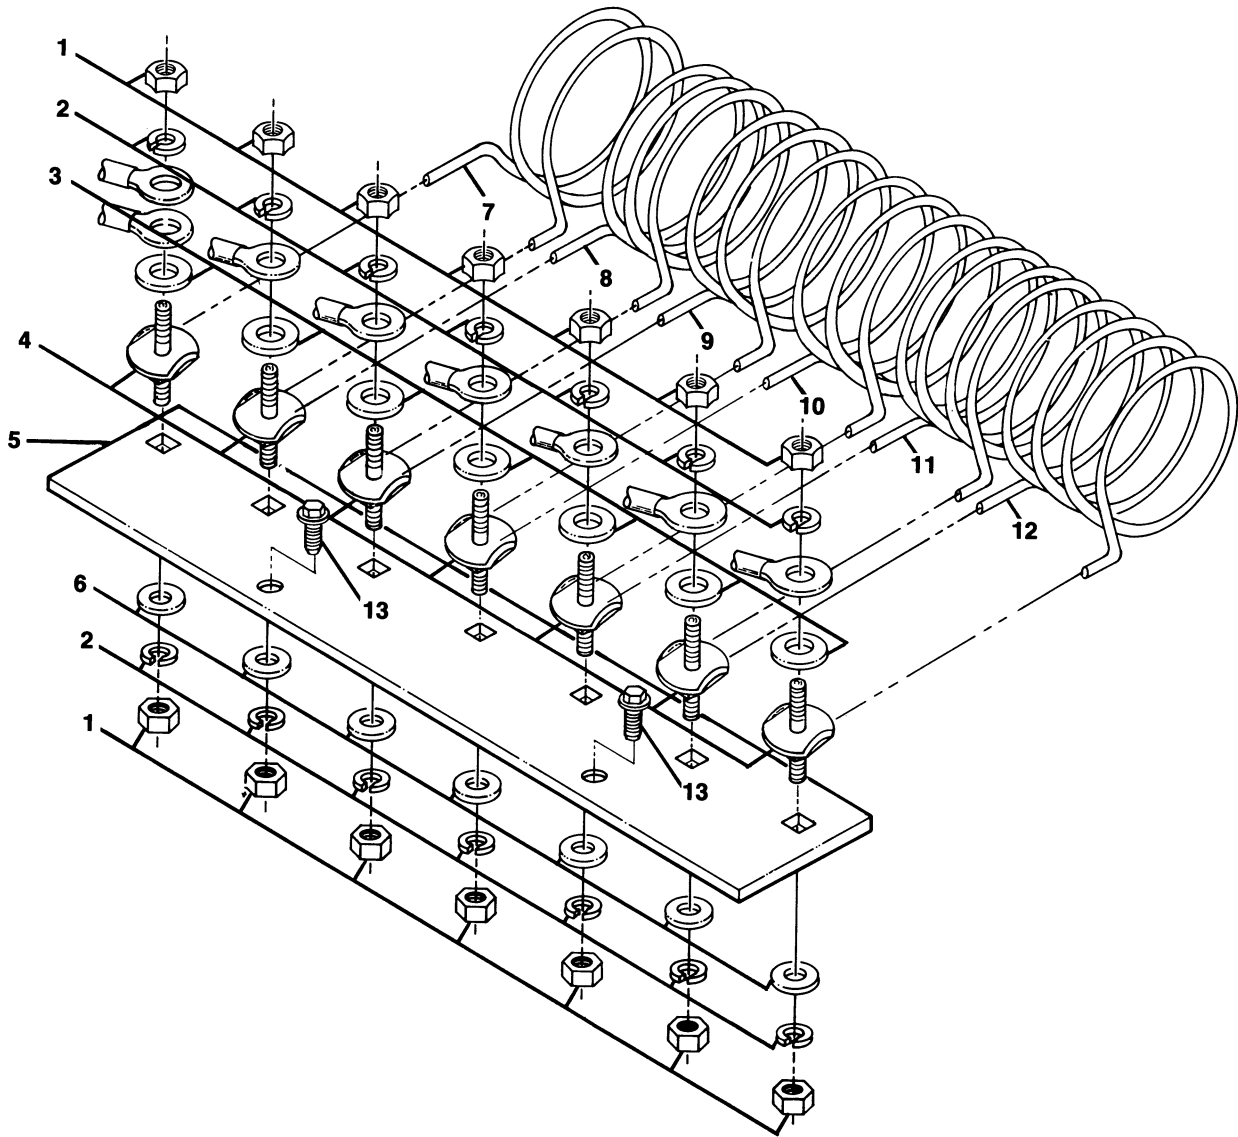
RESISTOR AND BOARD ASSEMBLY. SEE LIST 5-3.
